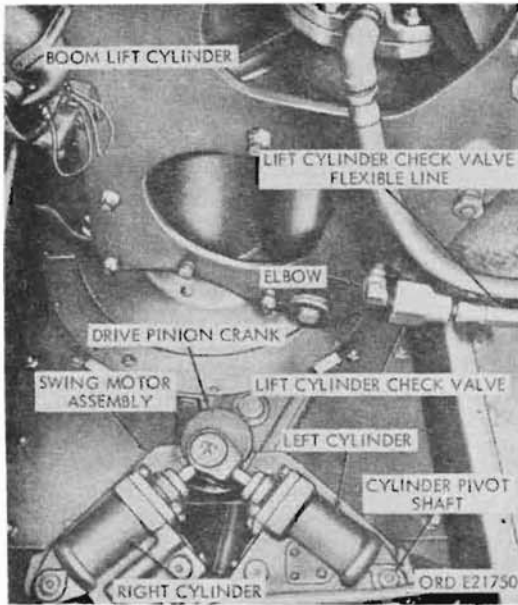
Boom lift hydraulic cylinder, check valve, and swing motor
